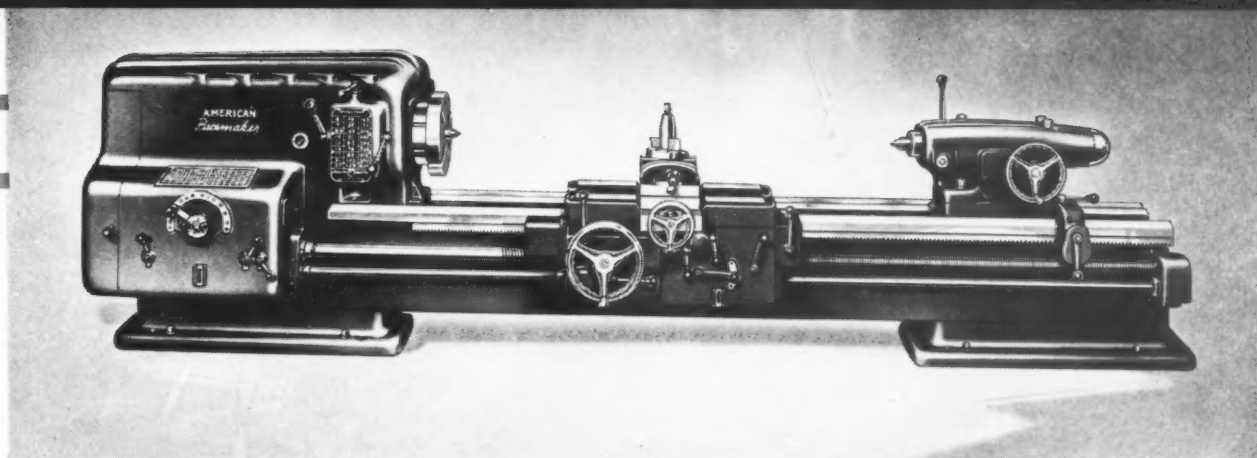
New 25-inch Lathe Added to American Pacemaker Line
